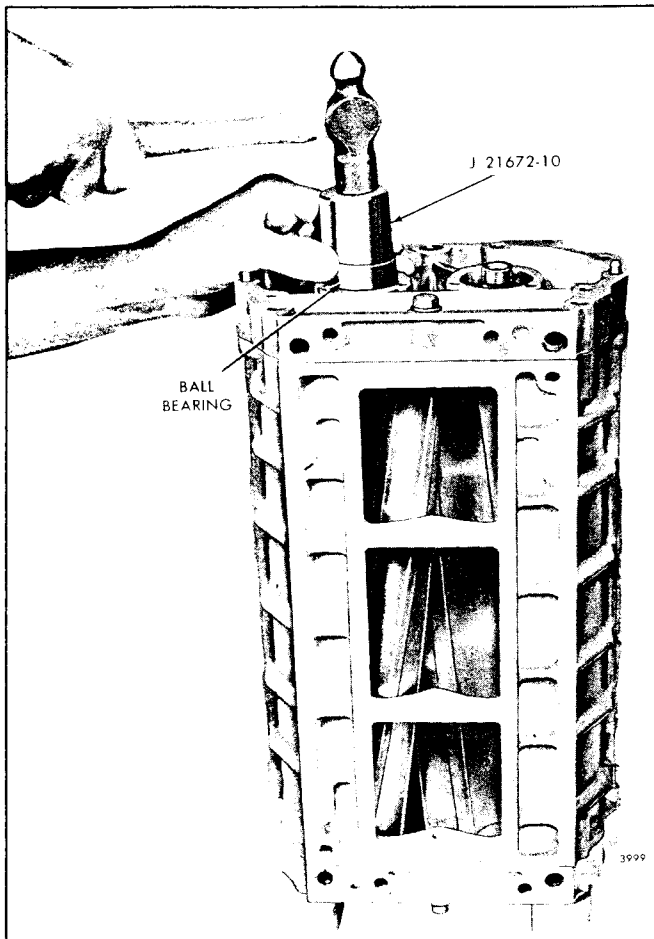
Installing Ball Bearings on Rotor Shafts and in Front End Plate (Former Blower)
